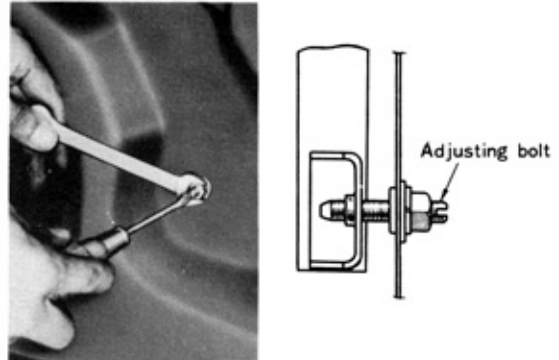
Division Bar Adjustment B 2368 G 4226
